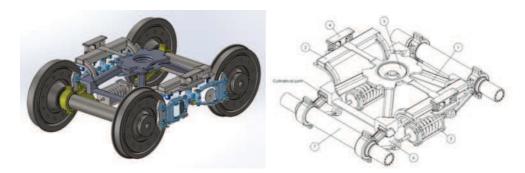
Left: 4L bogie with disc braking on wheel web. Right: main components of the 4L bogie. 1: pyramidal frame; 2: supporting arm for side bearer and brake callipers for wheel web mounted discs (or compact tread braking units); 3: centre bowl; 4: side bearers; 5: horizontal coil springs with single-stage progressive stiffness; 6: swinging arm; 7: Inboard bearings axlebridge for AIR wheelset (a design for conventional wheelsets already exists).
